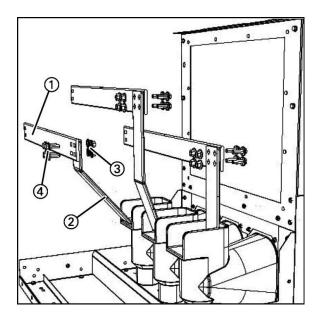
Assembly of 1250 A busbar, feeder ≤ 1250 A, Ur = 24 kV, bolted joints at the end panel
